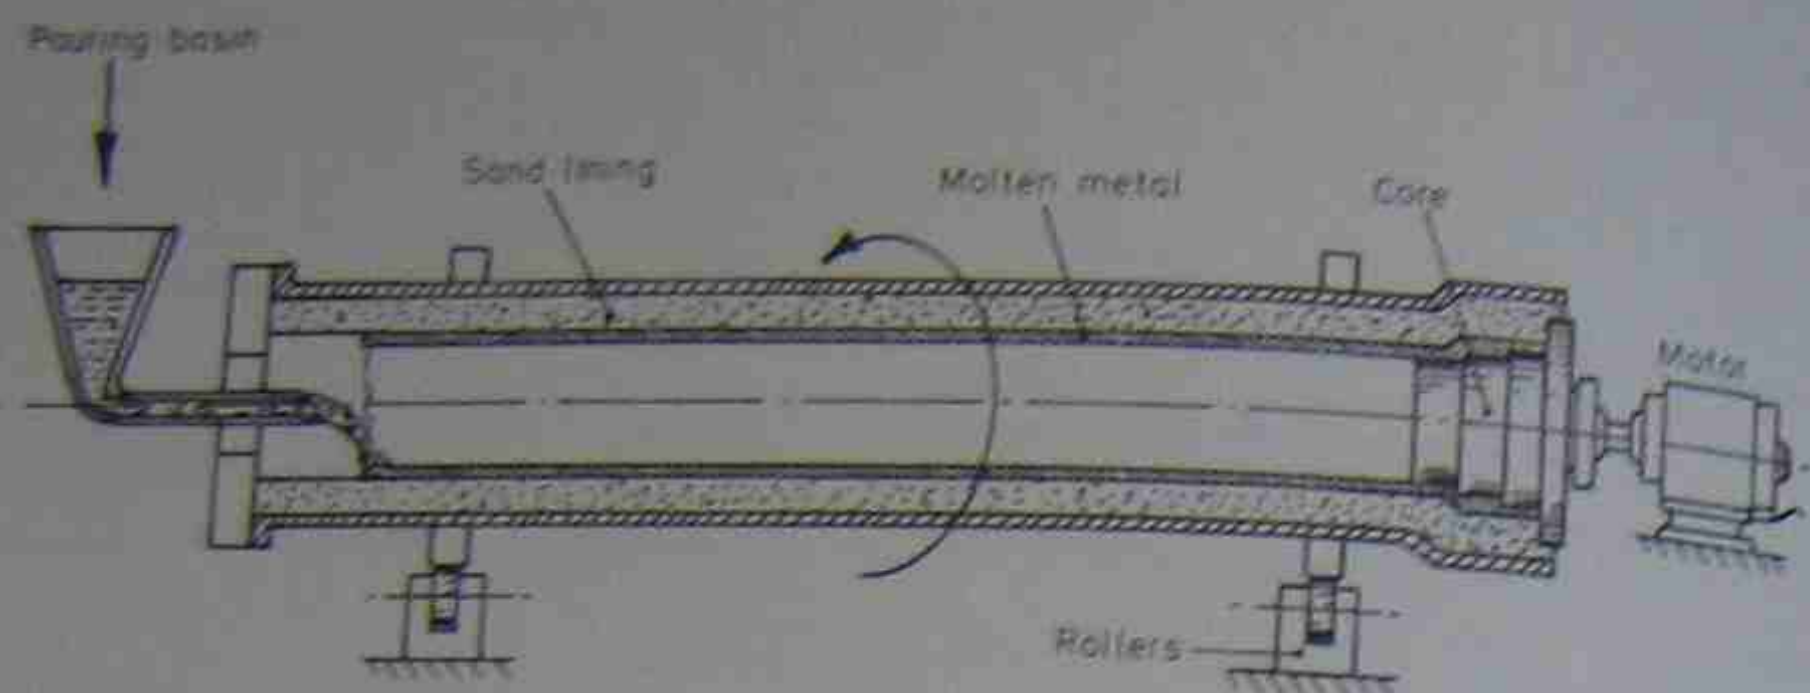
Centrifugal casting of pipe - horizontal axis
